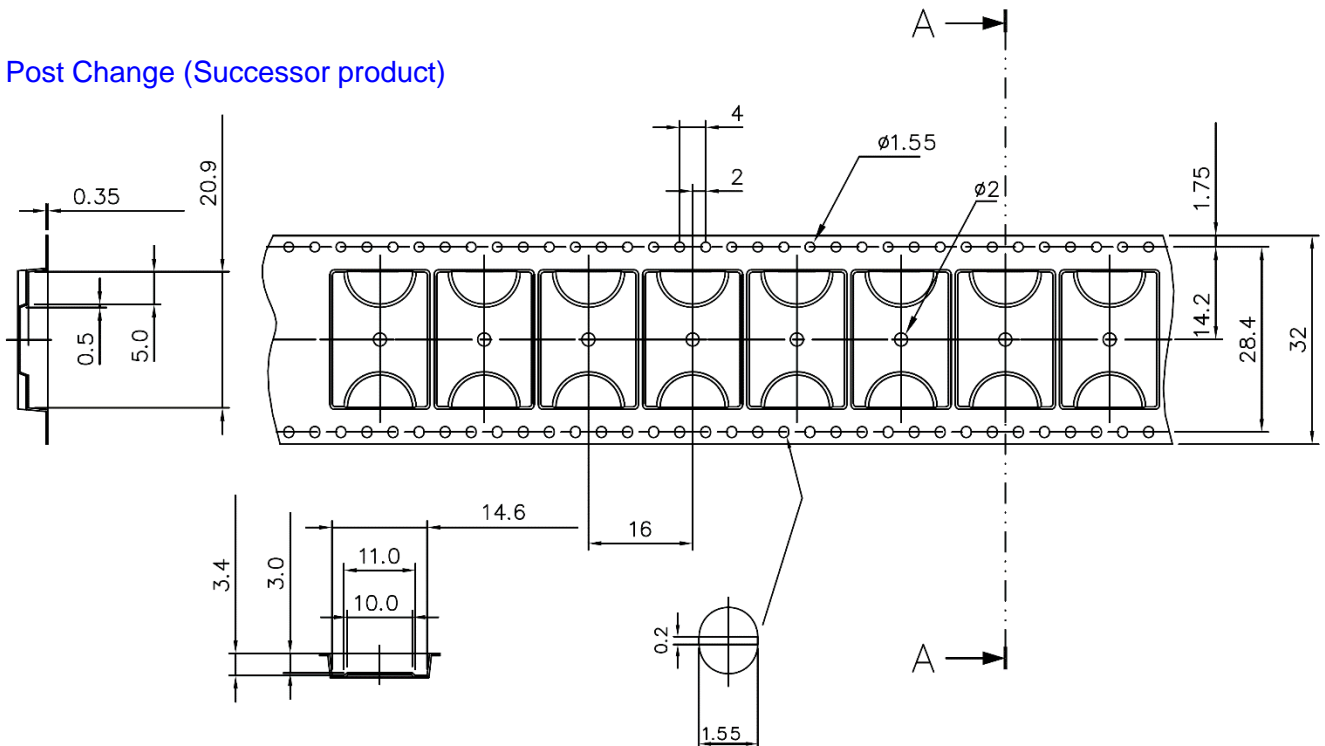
in-SOP Embossed carrier tape Dimensions (Unit: mm)
